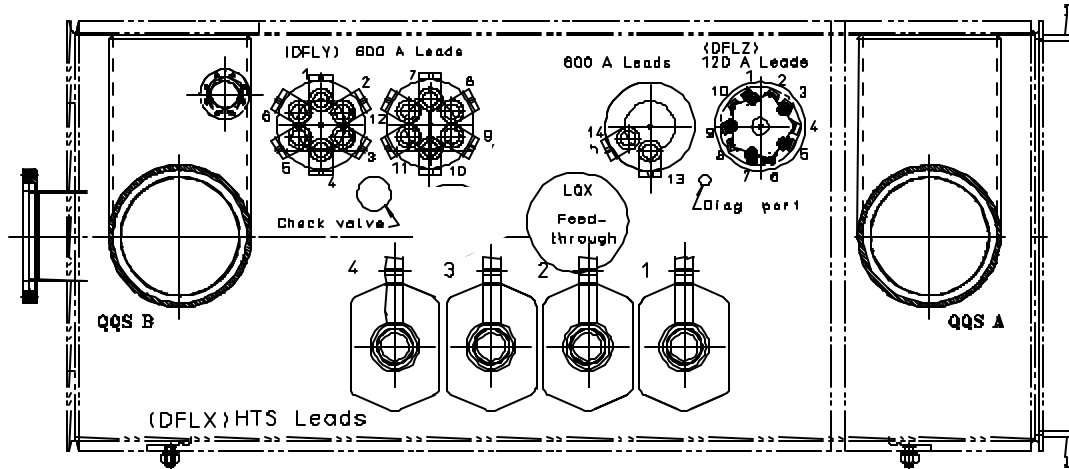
Location of LQX feedthrough assembly for DFBXA and DFBXE. The assembly is located at $y = -1150$.
